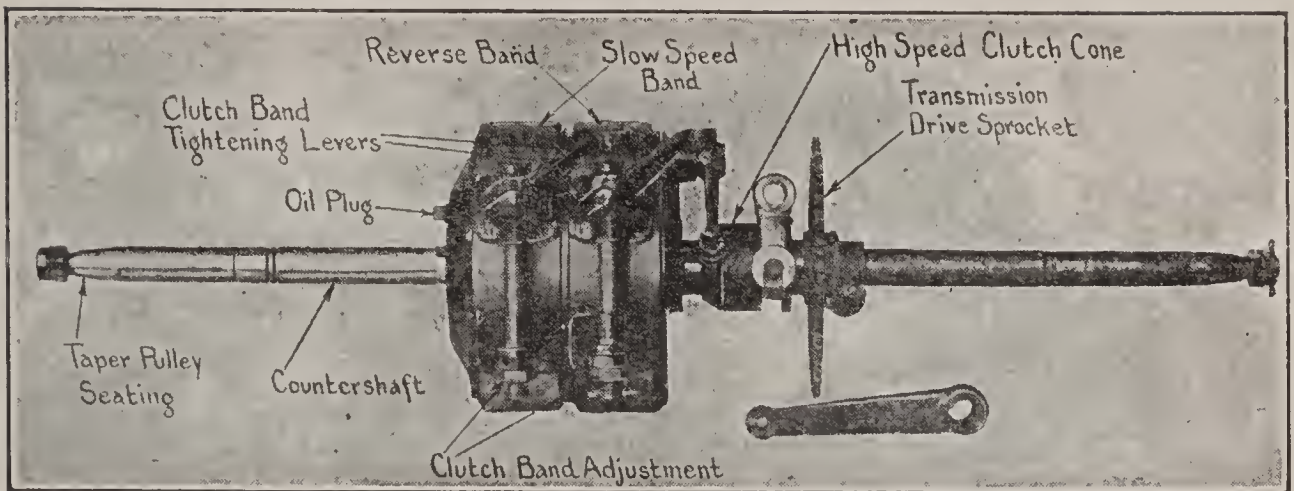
The Spacke Two Speed and Reverse Planetary Gearset Applied to Countershaft for Final Drive by V Belts.
